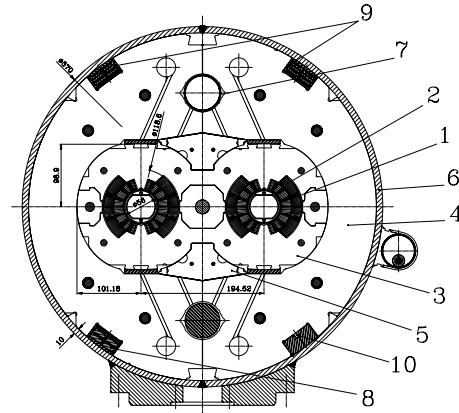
Cross-section of LHC pre-series dipole cold mass: 1-beam tube; 2-SC coils, "6-block" design; 3-austenitic steel collars; 4-iron yoke; 5-iron yoke "insert", 6-shrinking cylinder / He II vessel; 7-heat exchanger tube; 8-dipole bus-bars; 9-arc quadrupole and "spool-pieces" bus-bars; 10-wires for magnet protection and instrumentation.
